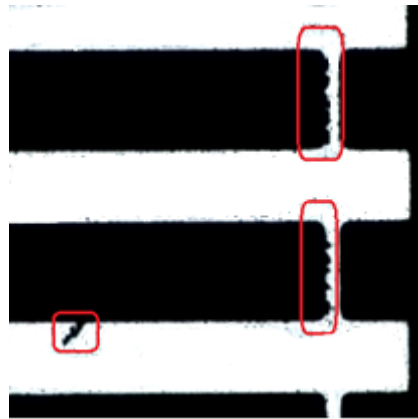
Example of photomask defects: edge protrusion and edge rub defect
